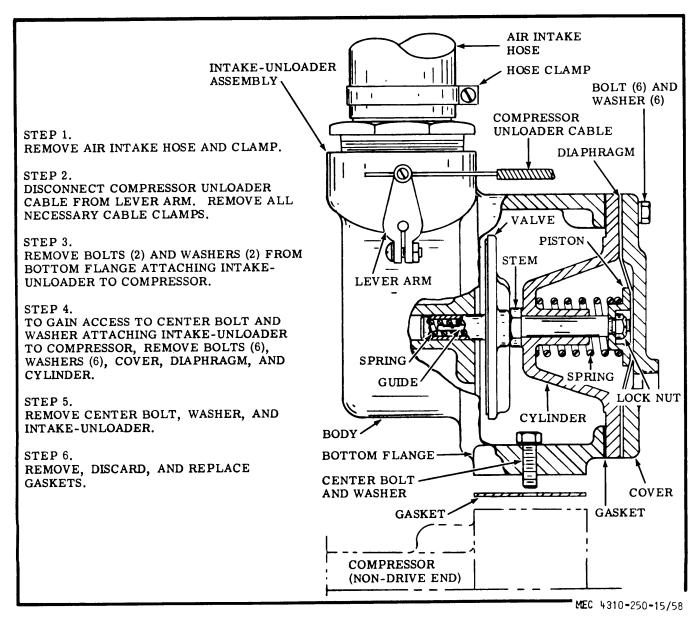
Compressor Air Intake-Unloader Assembly, Removal and Installation.
